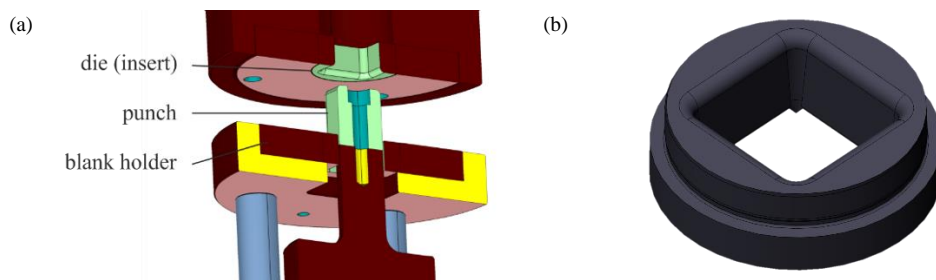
(a) CAD-model of the cupping test tool and (b) exchangeable insert of the drawing die
